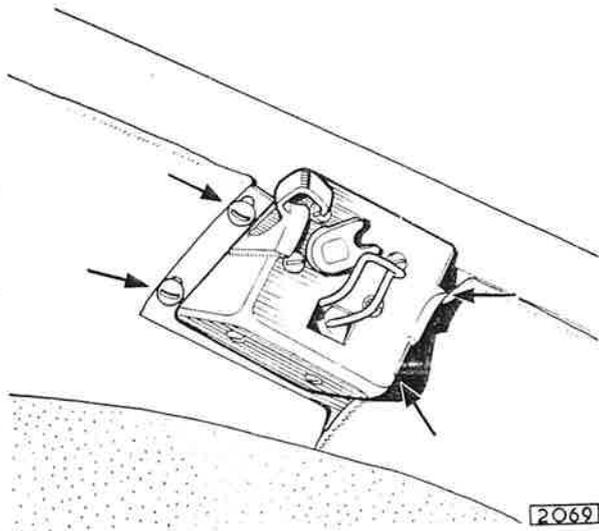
The adjustment screws for the luggage compartment lock (Fixed Head Coupe).
